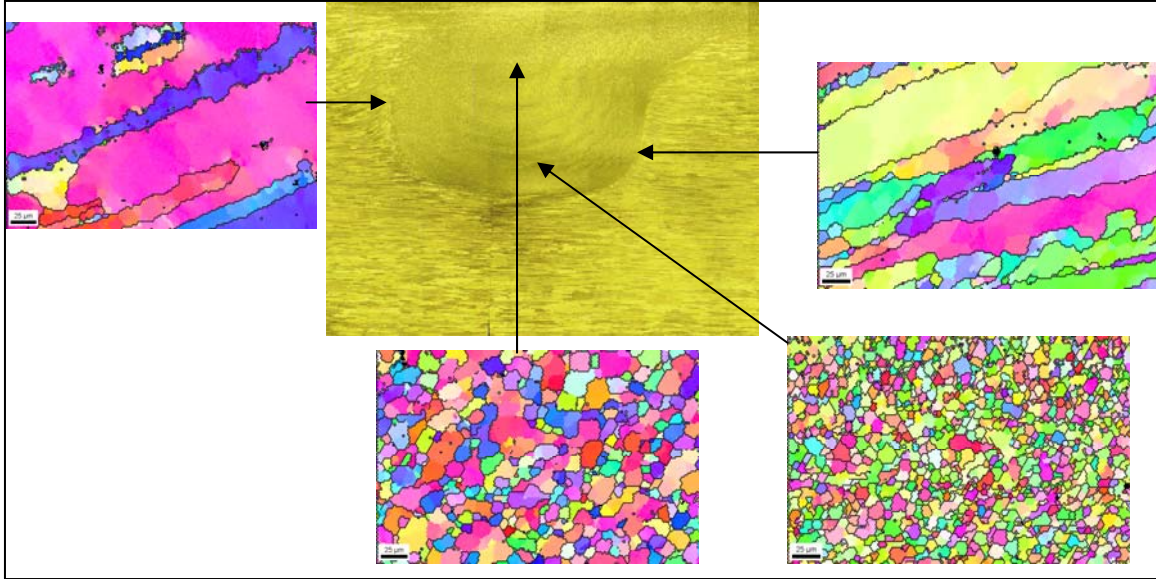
Misorientation Angle of the Transverse View of unanodized to unanodized, centerline weld location with a standard tool. (sample 1108)
